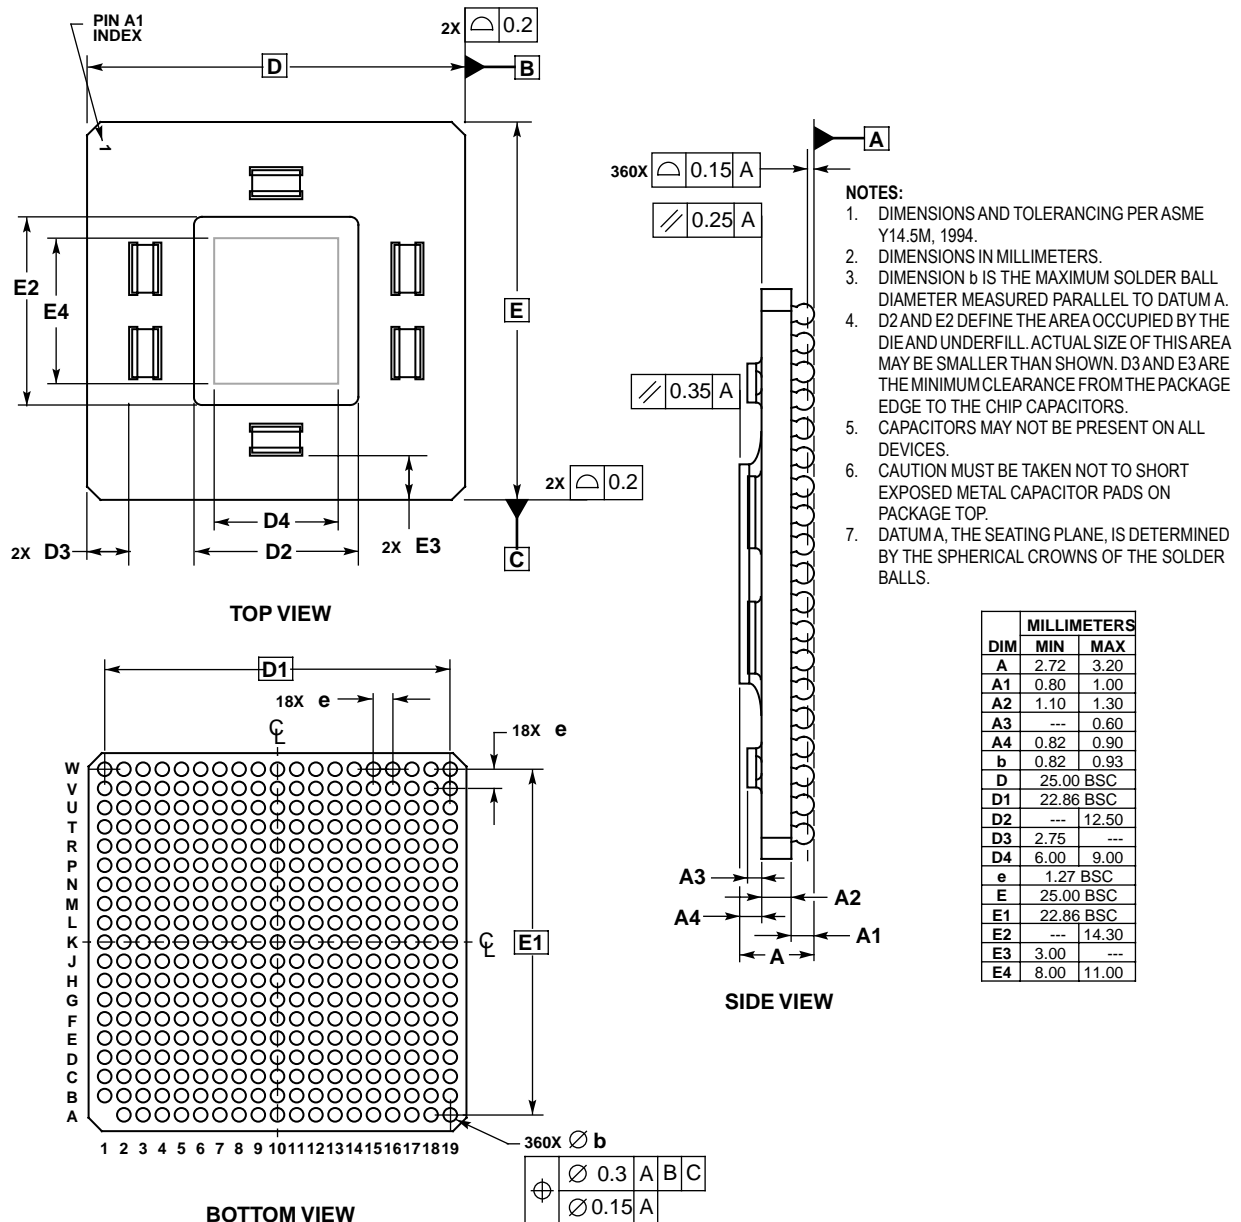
Mechanical Dimensions and Bottom Surface Nomenclature of the XPC750P
